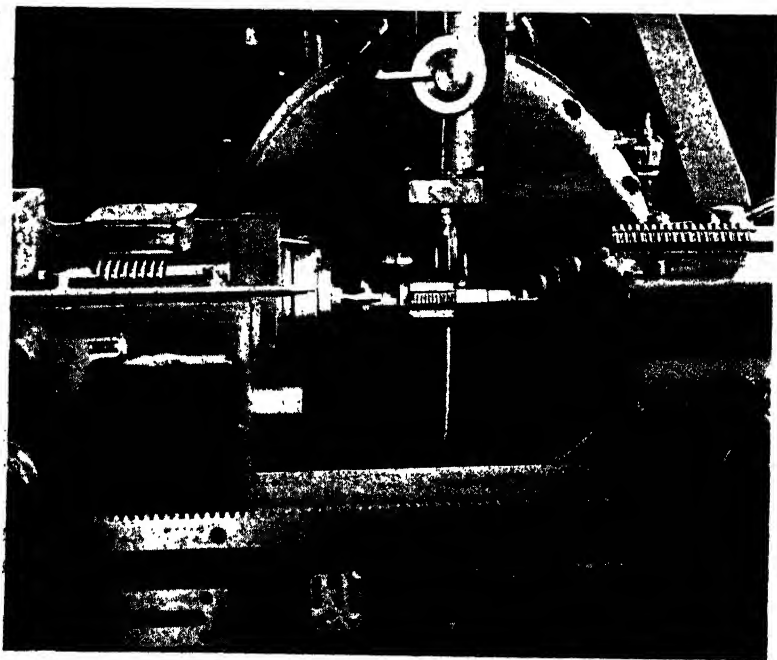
Grinding Screw Thread on Machine of Single-wheel Type
